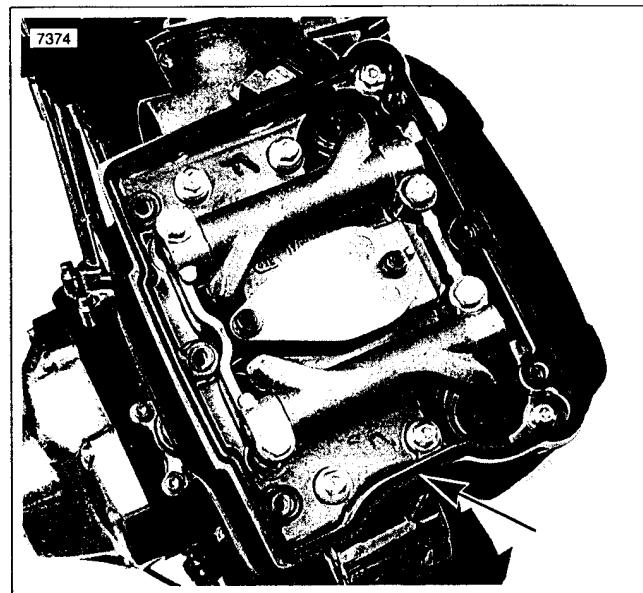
Rocker Cover Gasket Indent (Front Cylinder Shown)
